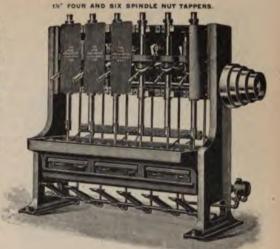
SHOWS SIX SPINDLE MACHINE.
